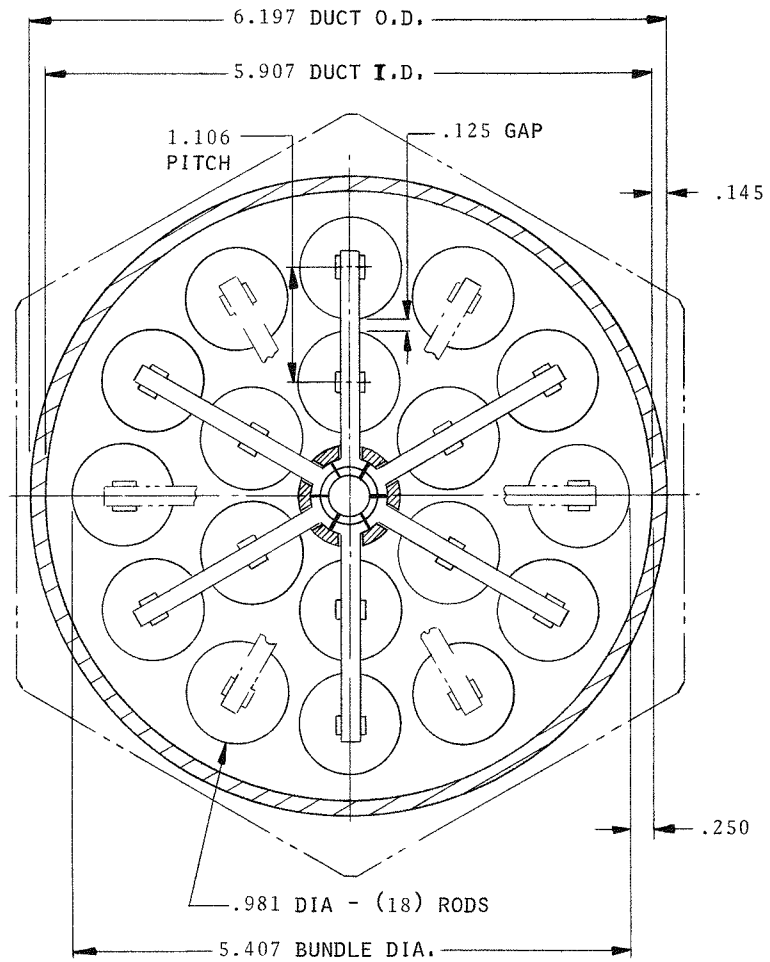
HINGED SUPPORT CONCEPT PLAN
